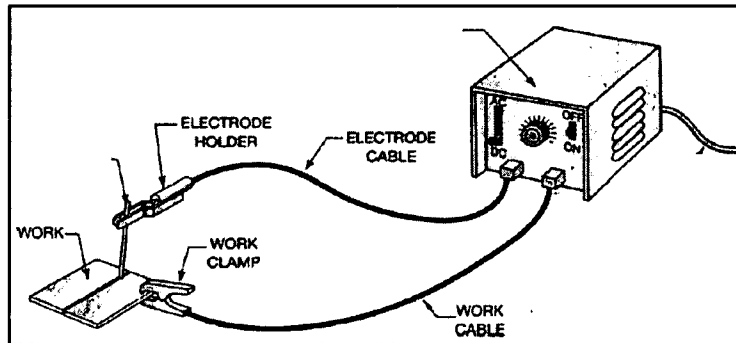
Shielded Metal Arc Welding Equipment [ 1 ]
